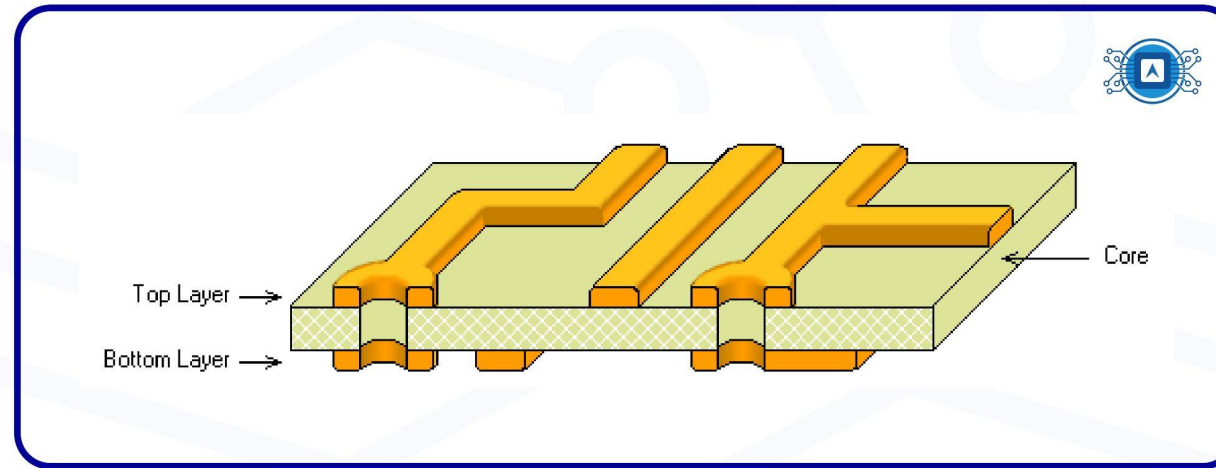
Two-layer PCB board, with conductive tracks on the top and bottom sides of the board. Source: Altium <<https://www.altium.com/documentation/altium-designer/understanding-printed-circuit-board-makeup?version=17.1>>.
